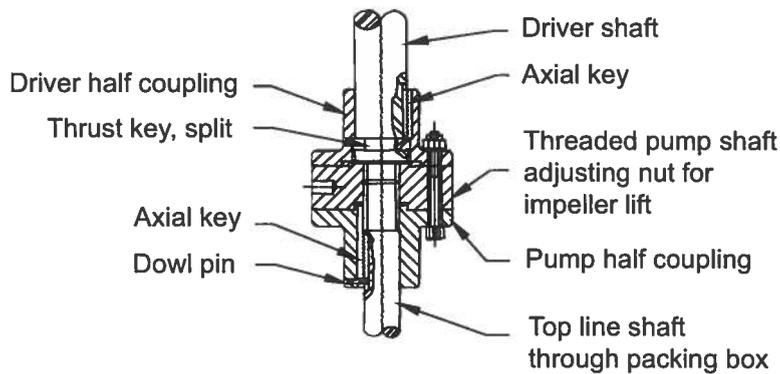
Flanged adjustable coupling, rigid style
